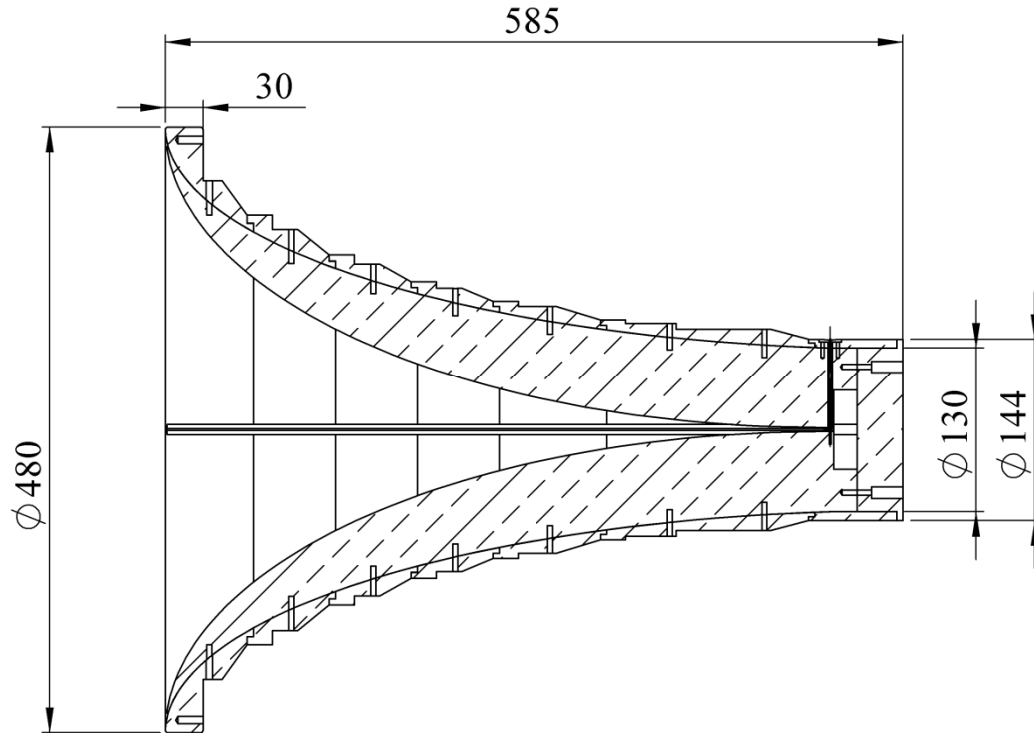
A cut plane drawing of the antenna assembly, indicating outer dimensions (in mm).
